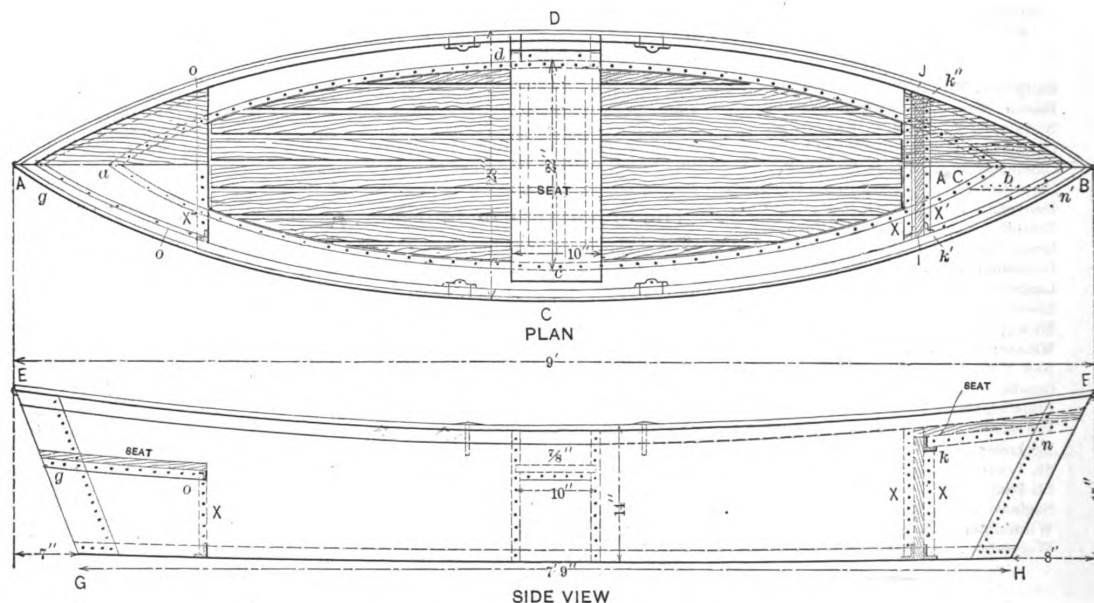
Plan and Side Elevation of a 9-foot Skiff.
